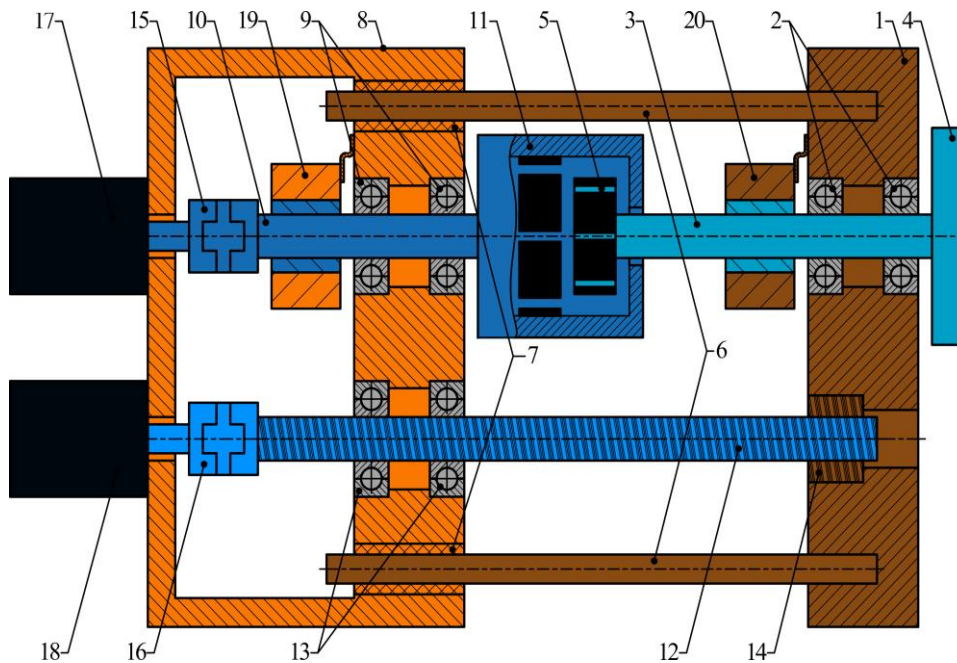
VSA concept – ATTRACTOR: 1. fixed frame, 2. bearings, 3. output shaft, 4. flange, 5. inner magnetic ring, 6. guiding shafts, 7. linear bushings, 8. rigid carriage, 9. bearings, 10. input shaft, 11. outer magnetic ring, 12. lead screw, 13. bearings, 14. nut, 15,16. clutches, 17,18. DC servomotors, 19,20. absolute optic encoders
